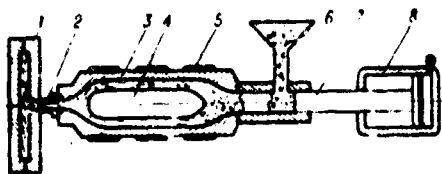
Schematic of casting machine. 1) Casting form; 2) nozzle; 3) heating cylinder; 4) splitter (torpedo); 5) heater elements; 6) feeder; 7) material plunger; 8) hydraulic cylinder.
